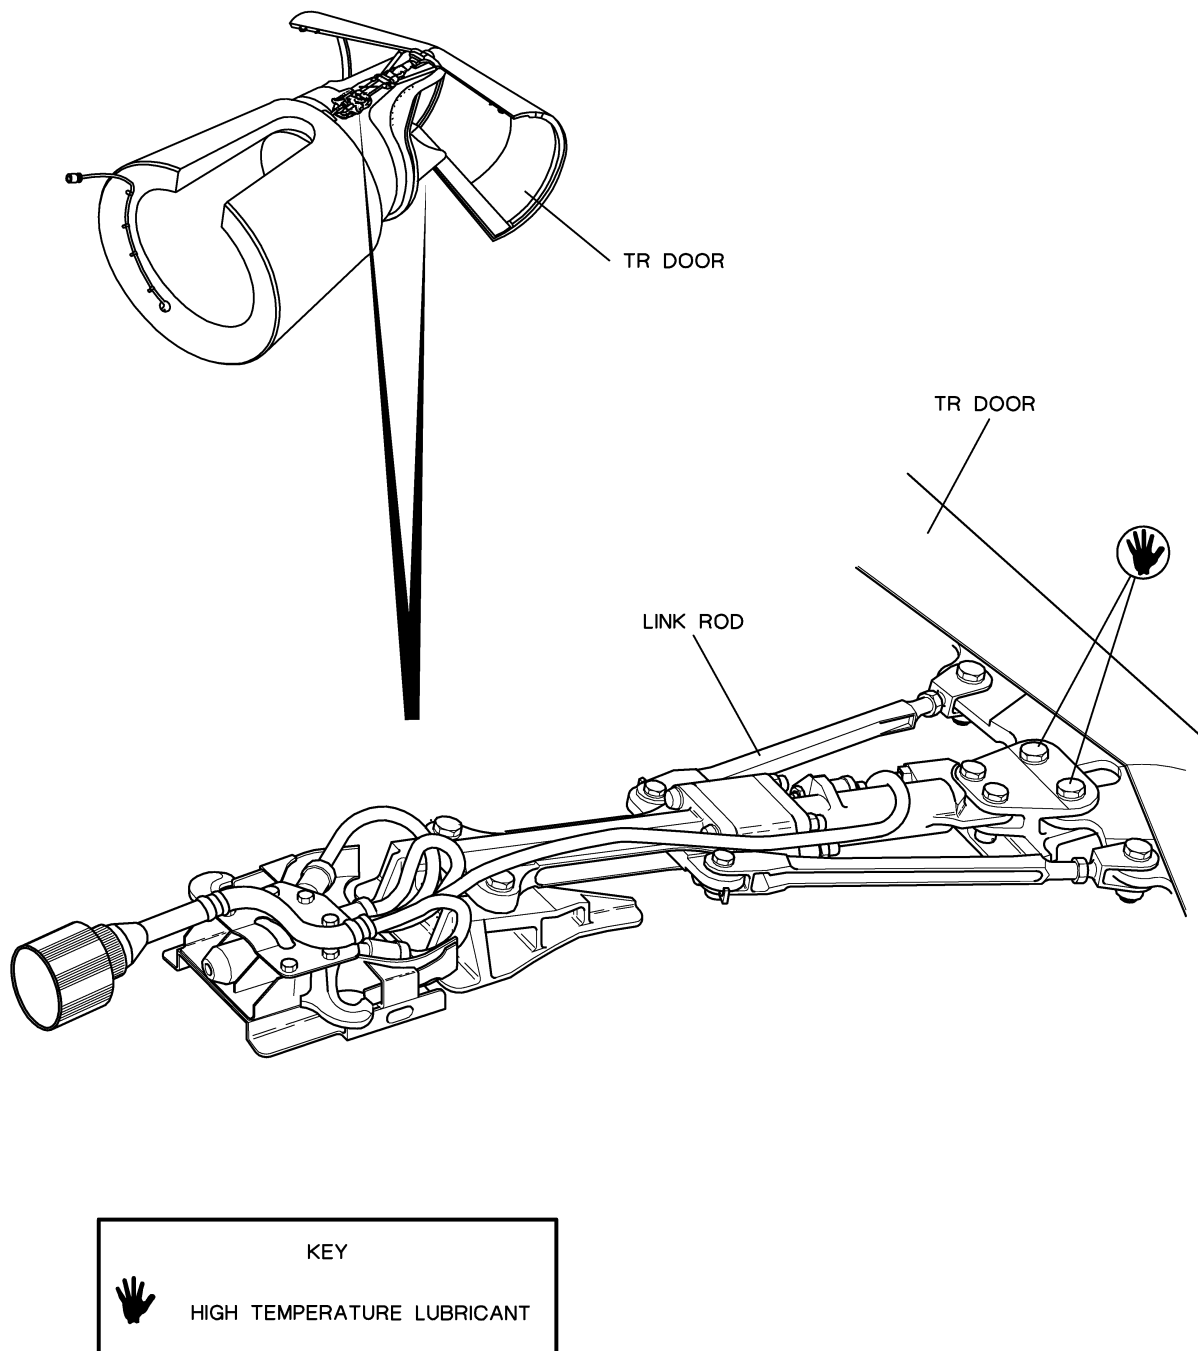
GREASING OF THRUST REVERSER DOOR HINGE BOLTS
